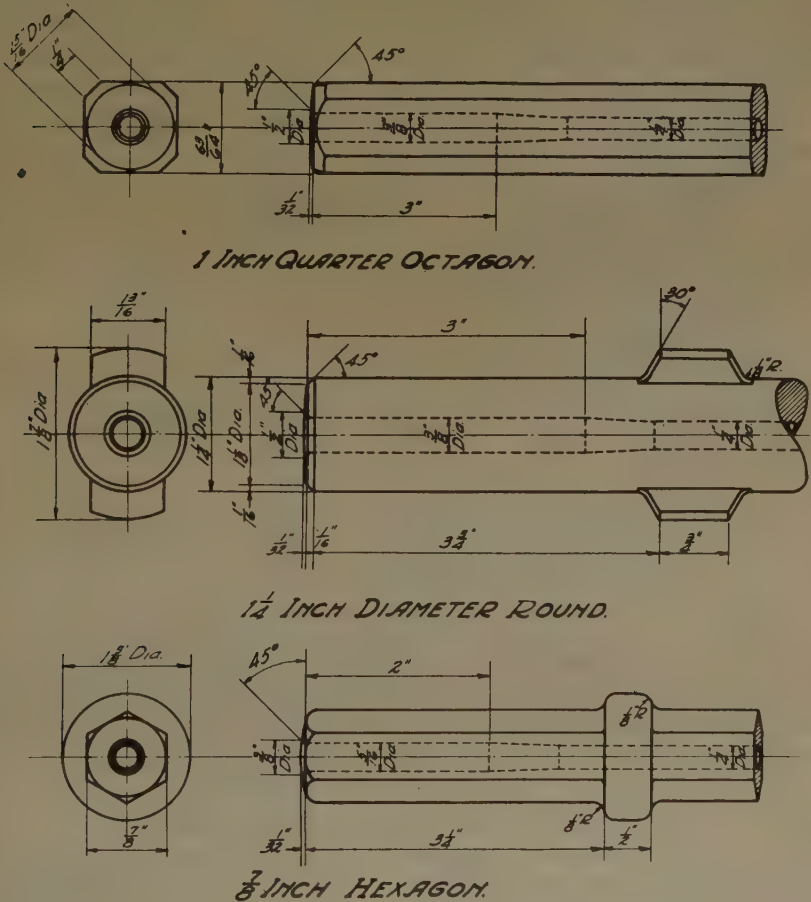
MACHINE ENDS OF HOLLOW DRILL SHANKS.
